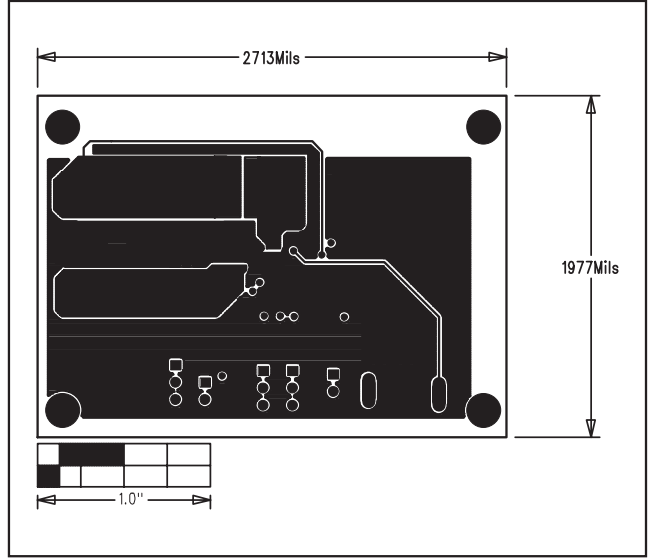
MAX8646 EV Kit PCB Layout—Solder Side
